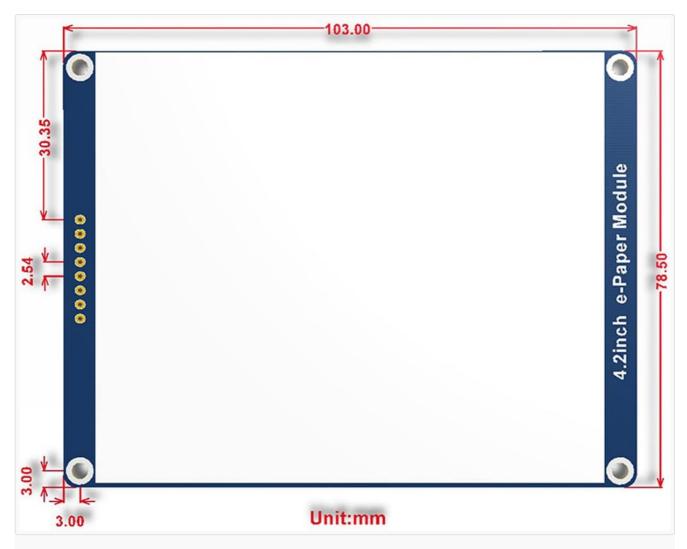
Dimensional drawing of the 4.2-inch E-Ink Display Module (B), with measurements in millimeters.
